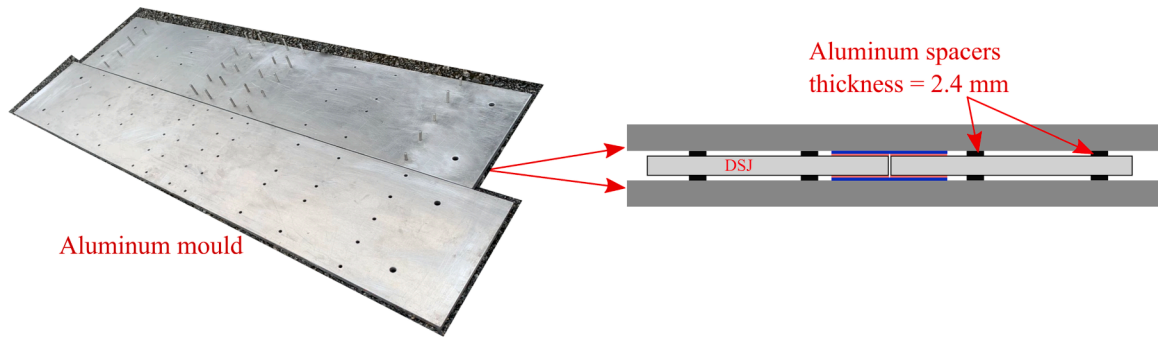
Aluminium mould for the fabrication of DSJ specimens.
